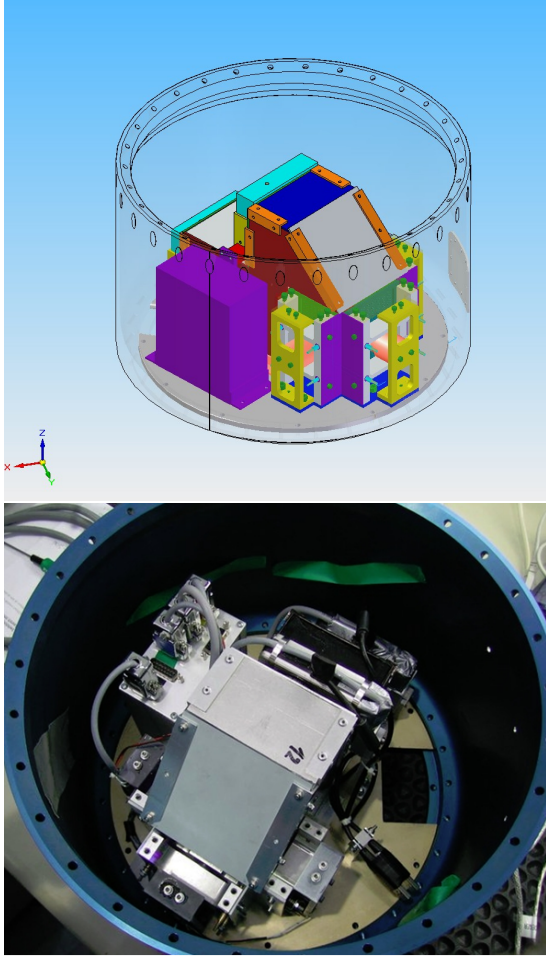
CAD-Drawing (top) and photo (bottom) of the final experiment design mounted in the REXUS 10 rocket module (350 mm outer diameter, 200 mm height). Setup components are shown in Fig. 3.
